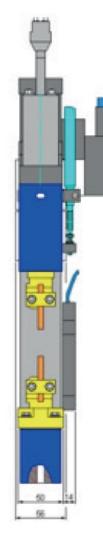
, F160, FD120 - Spot Welding Heads for Automation
